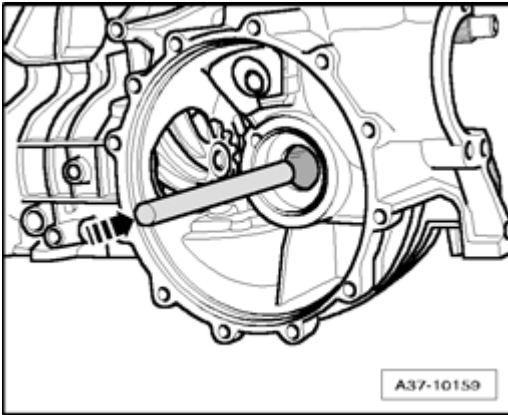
Pressing Protective Tube From Differential Side, Sideways Out Of Transmission Using A Suitable Drift
